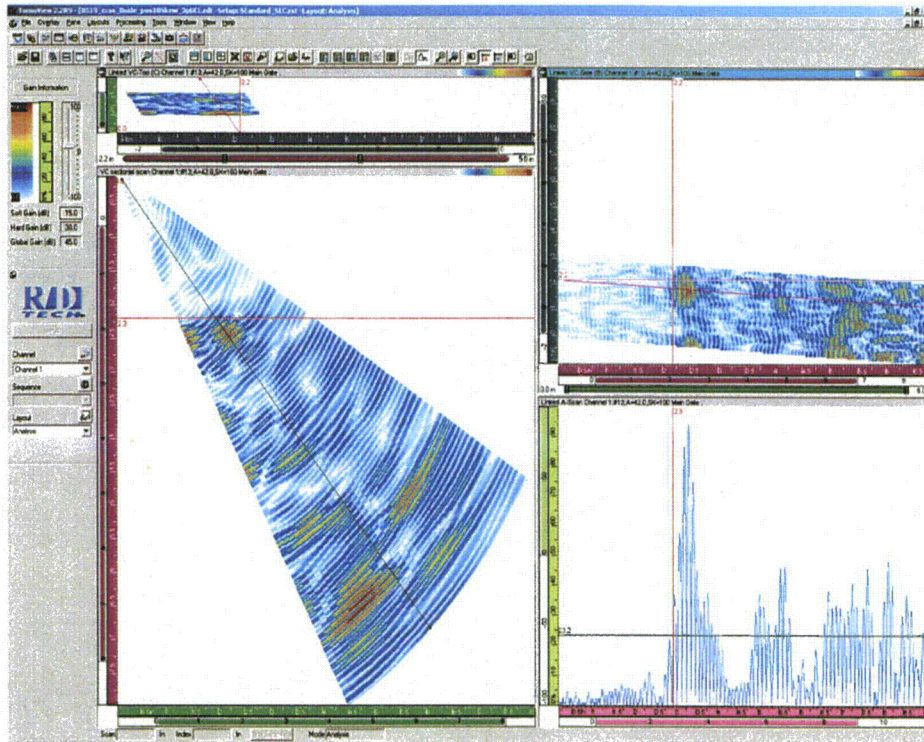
B519 as Inspected from the Columnar Side of the Weld, Showing a Marginal Detection
